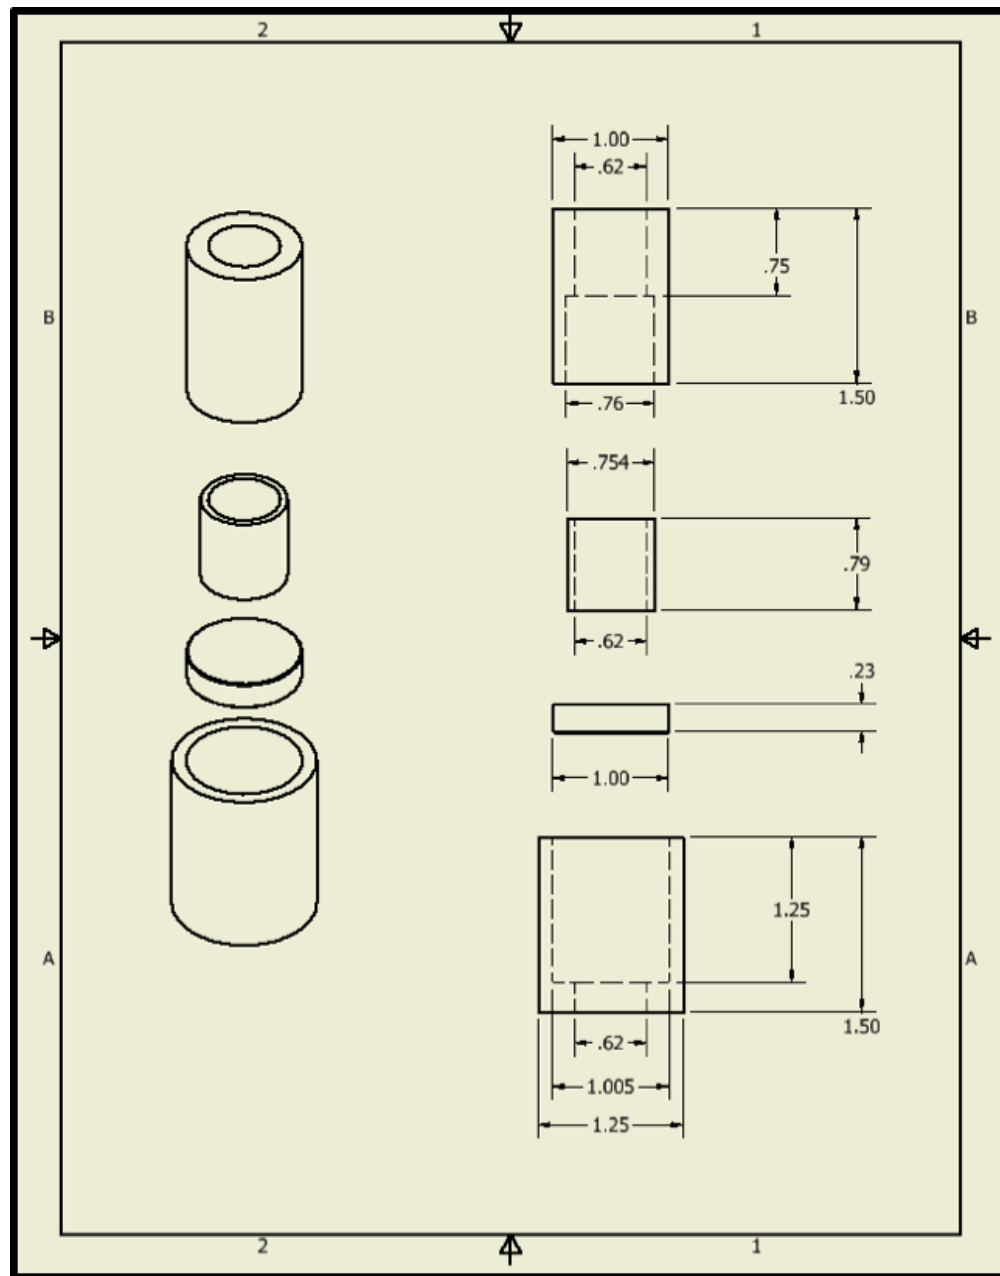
Transfer Cavity Assembly Jigs: The dimensions of the mirror jig and piezo jig are shown in this drawing. In addition, the drawing includes the pictures of the mirror and the piezo to demonstrate how the jigs are used.
